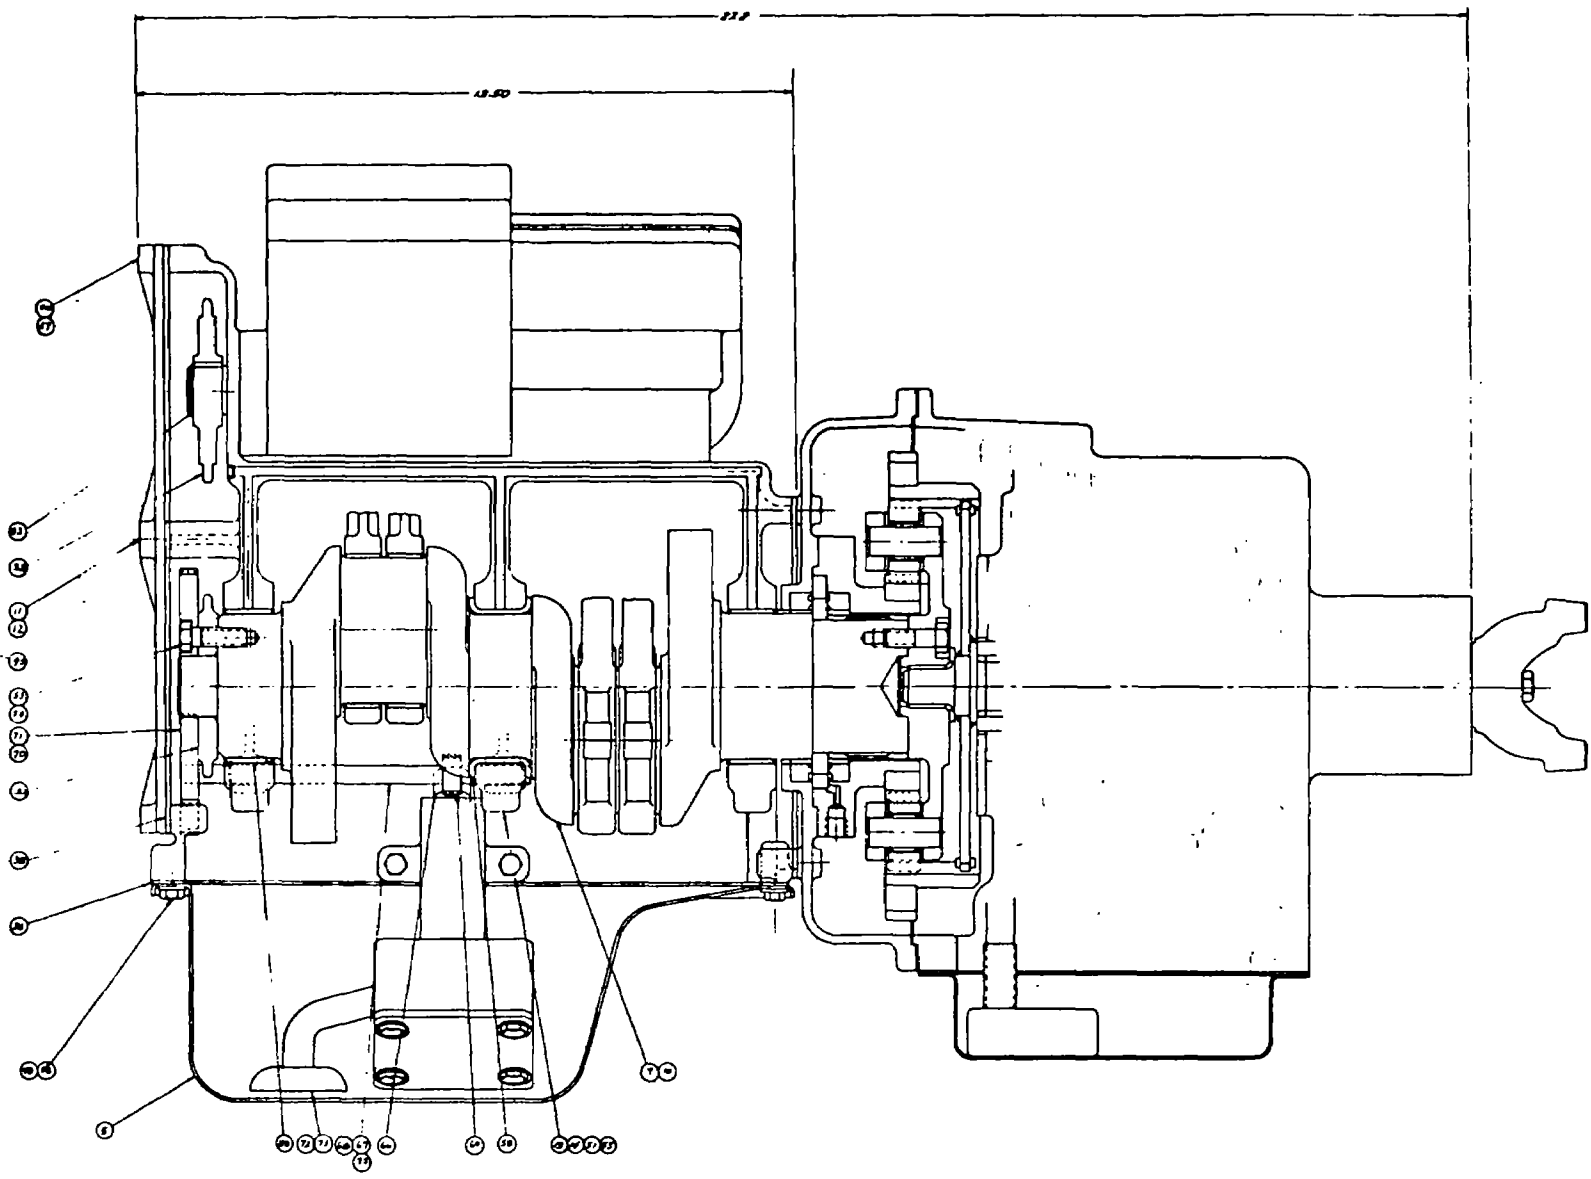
3.13 V-4 Expander with Hydraulically Actuated Valves, Side View.
